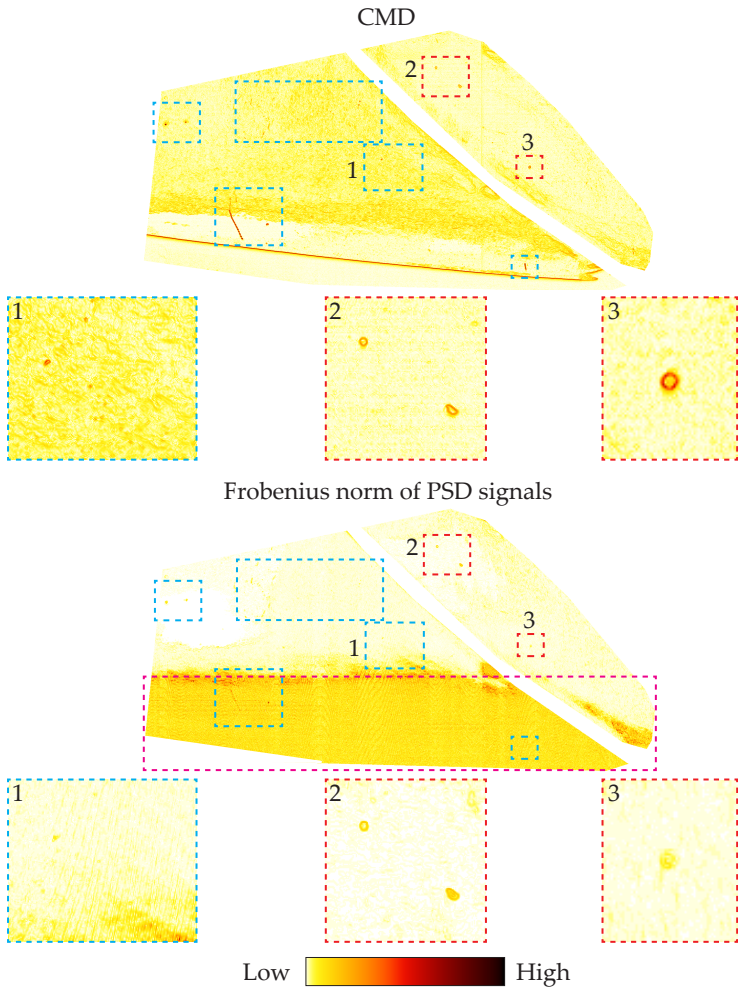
Inspection images of the investigated headlamp cover shown in pseudo colors. Intense edges and design structures of the test object have been masked out. Some of the defects are magnified under the respective inspection image.
